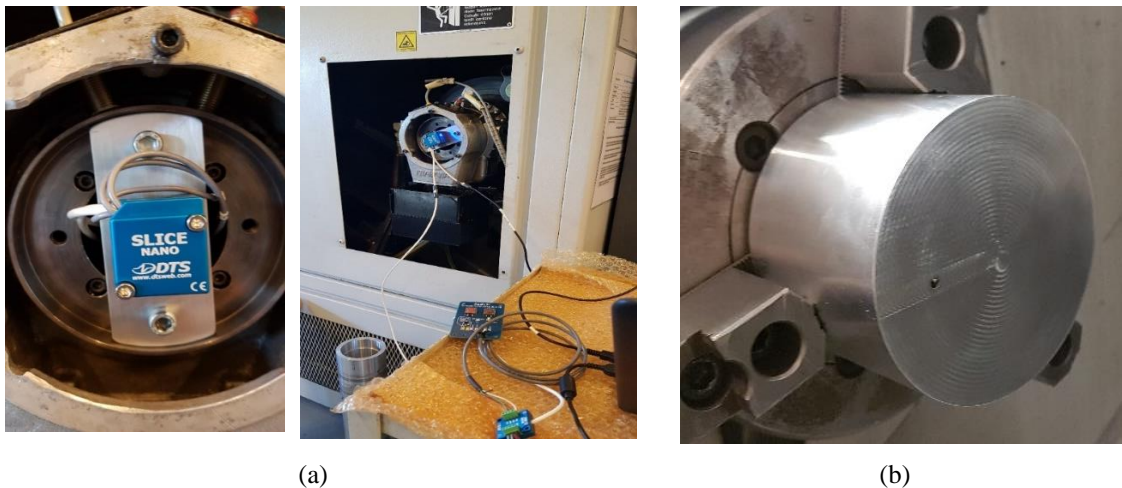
(a) DAS setup on the spindle for temperature measurement of workpiece (b) The position of the thermocouple on the workpiece.
